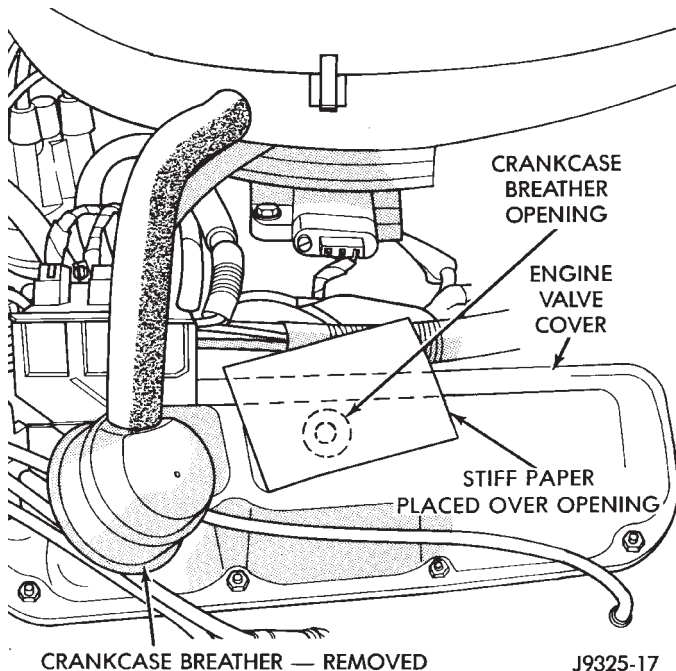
Check Vacuum at Crankcase Breather Opening—Typical
